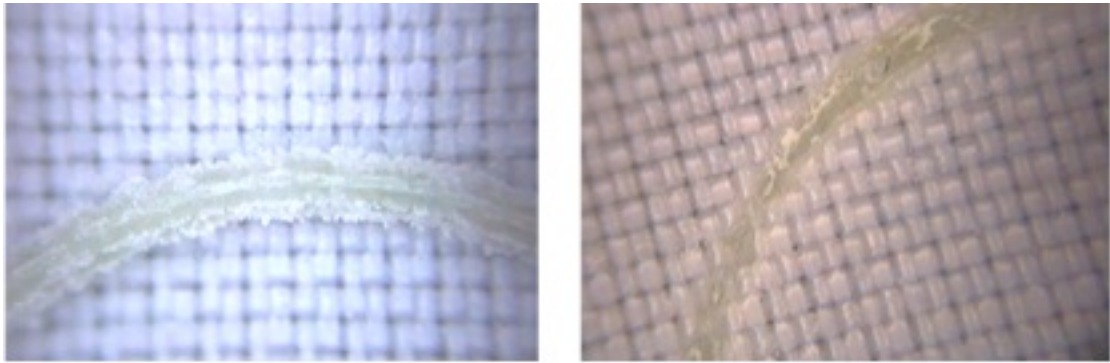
Detail of sample 10 in Figure 271. Top view, (left) shows loose unmelted powder attached to the sintered circle. Underneath view (right) showing the fused weld.
